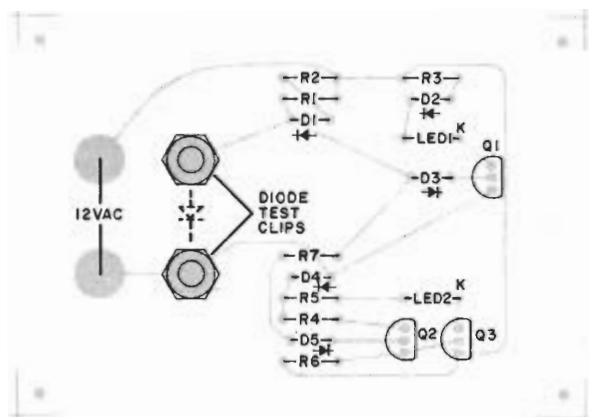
Pc board can be used as case cover with component mounting as shown at left.
